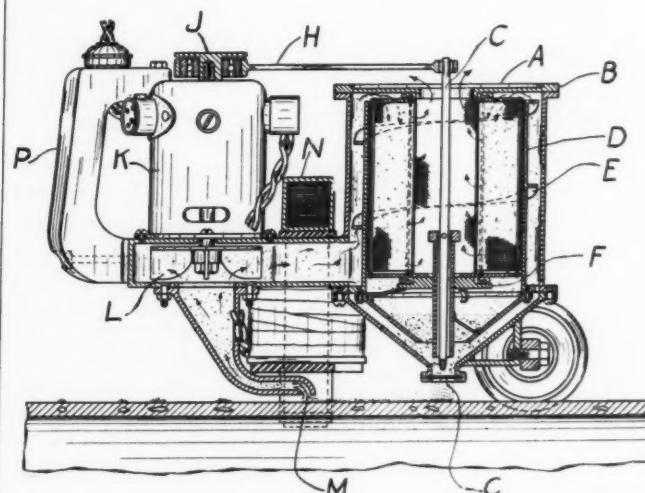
Subsurface defects can be detected by machine which leaves traces of powder at defective areas
